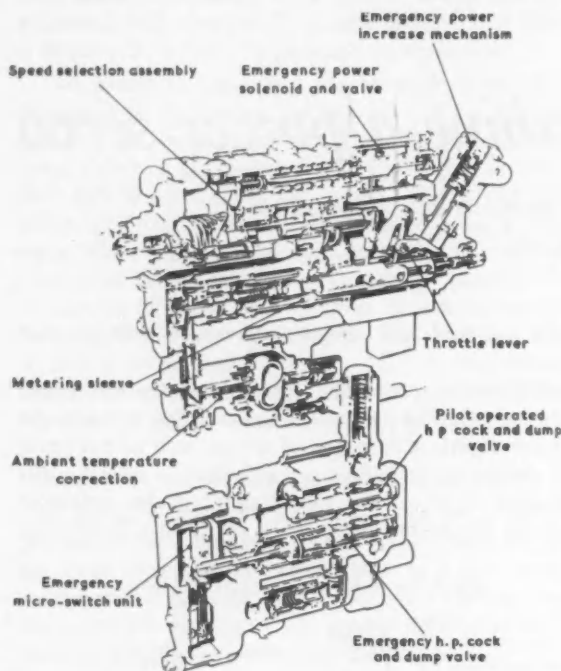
Fuel-metering high-pressure shut-off cock and dump valve assembly
